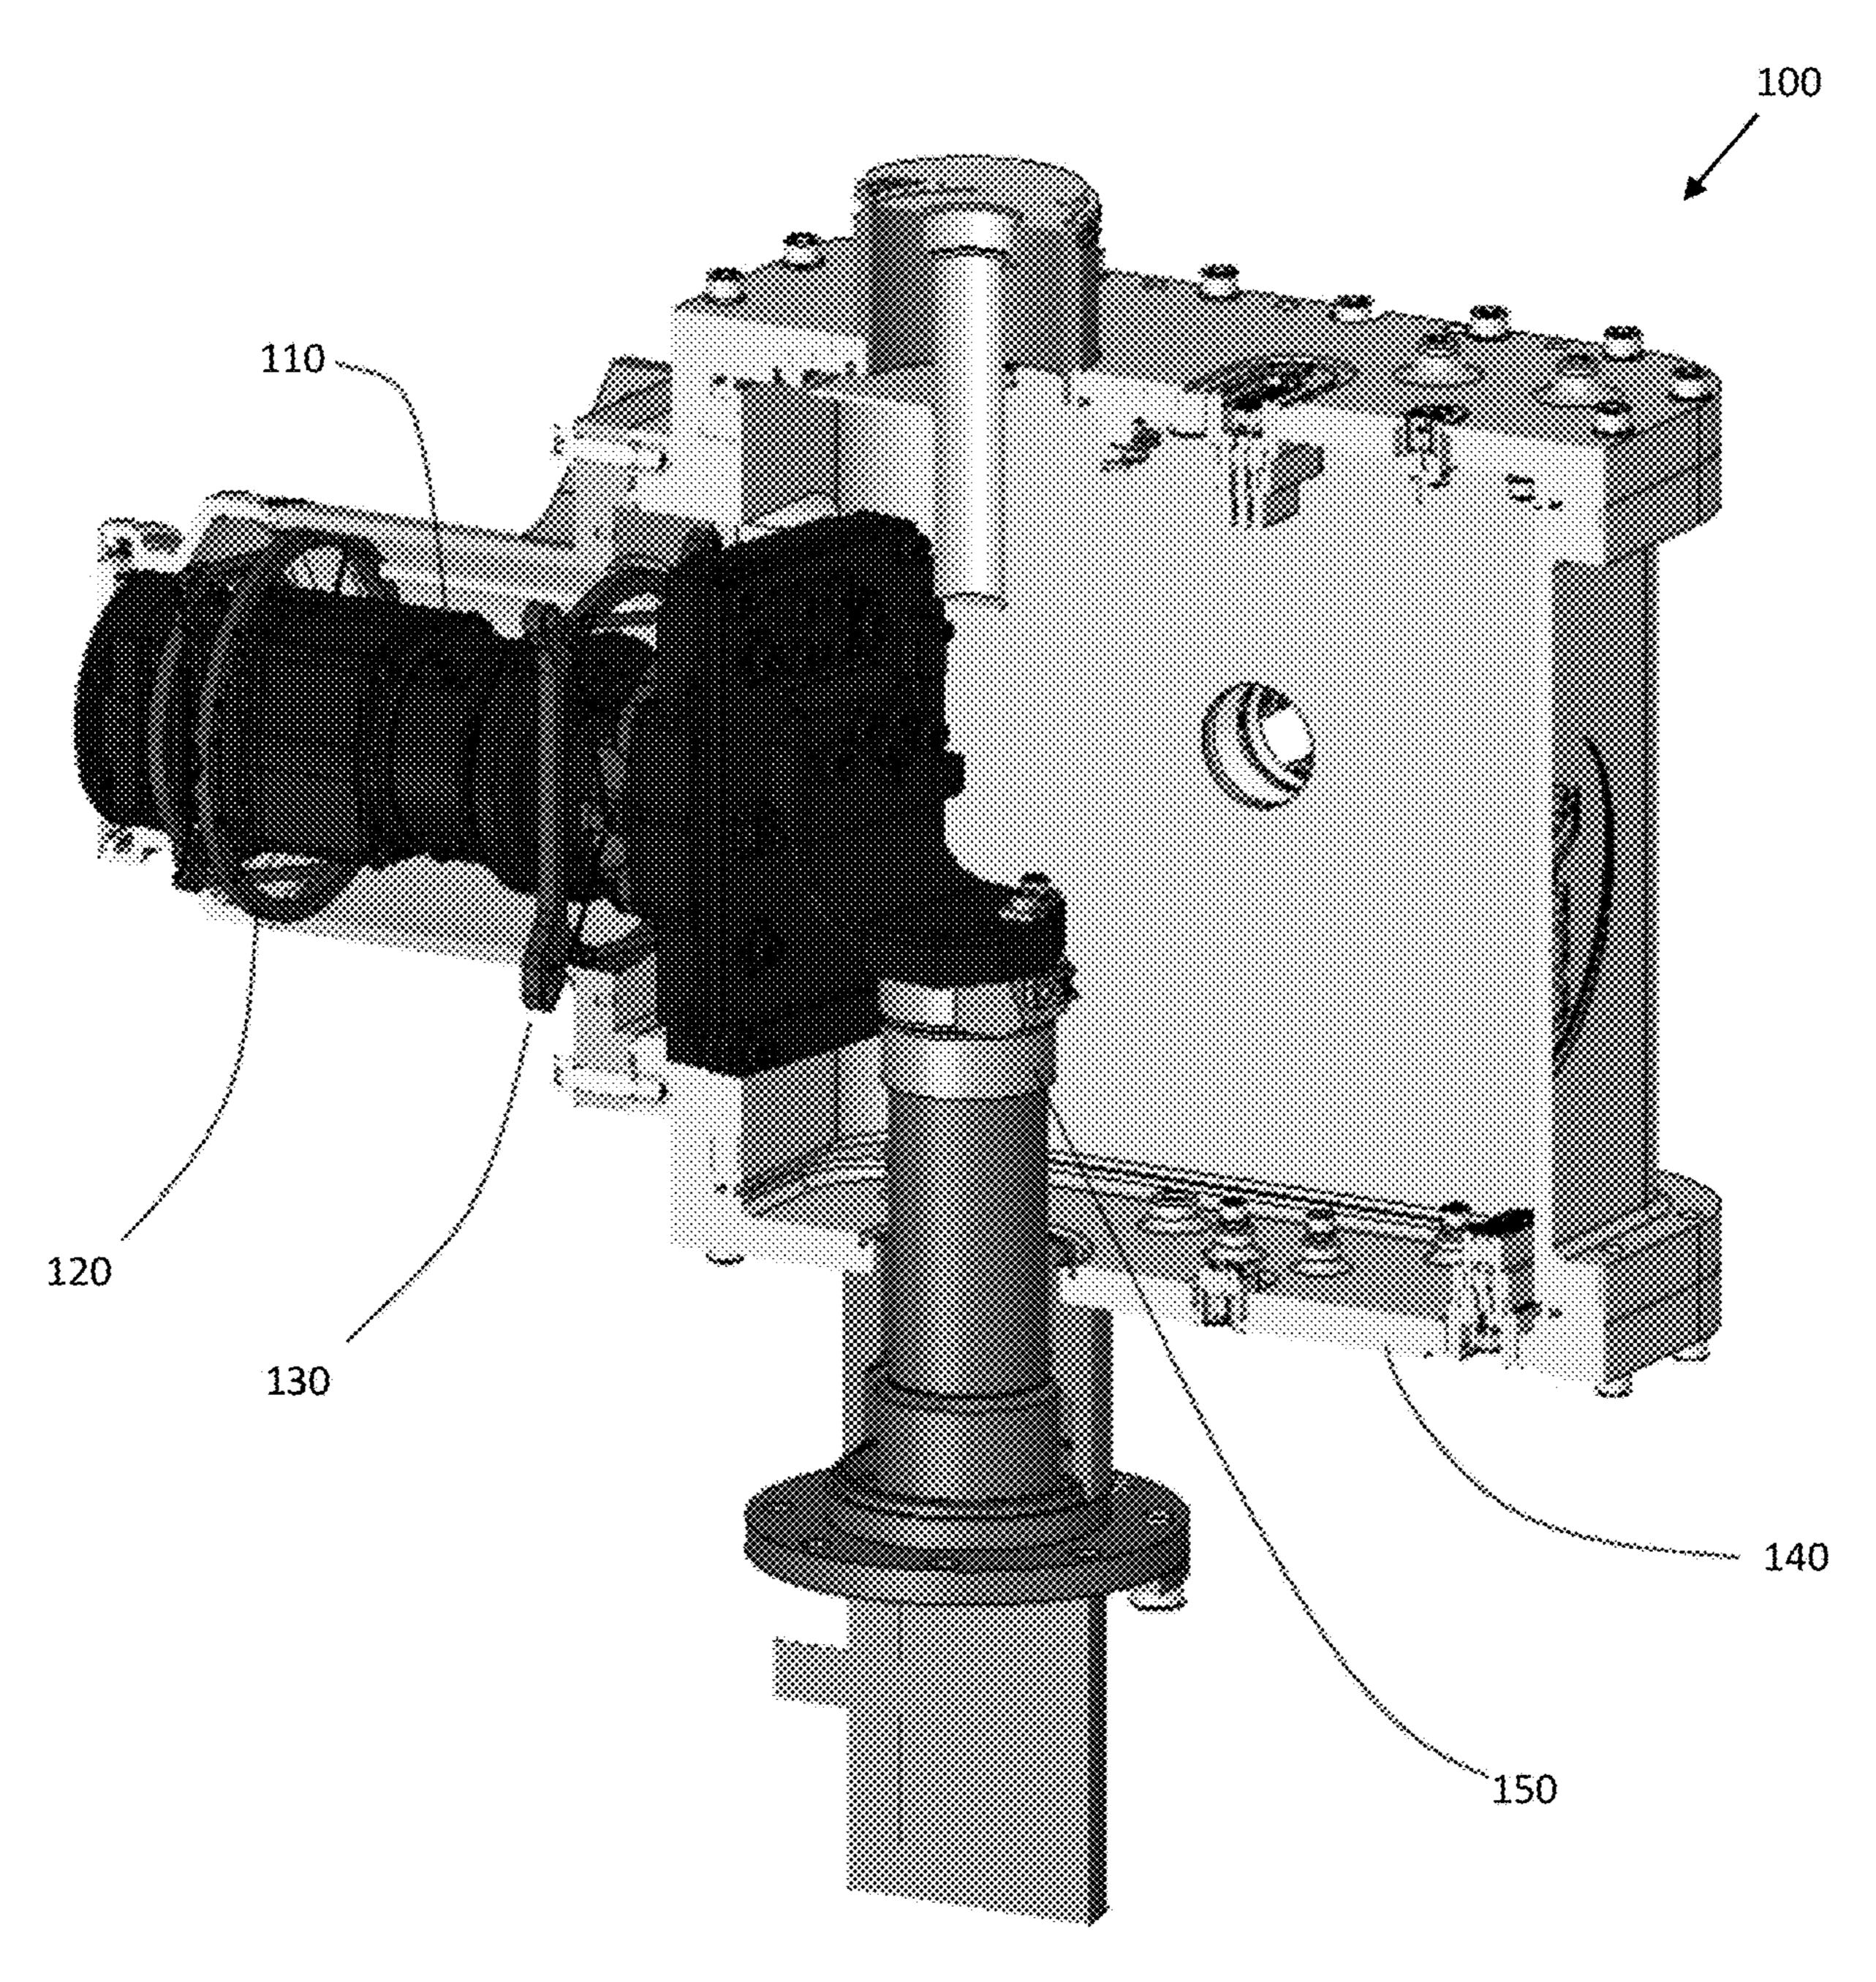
Cross-Sectional View of an Embodiment of the Disclosed Invention Supporting Electronic, Optical, and Mechanical Components in a Dewar
